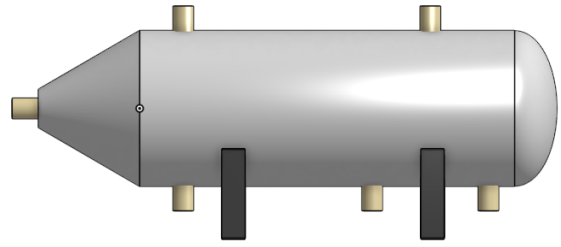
Horizontal assembly view of the pressure vessel CAD model.
